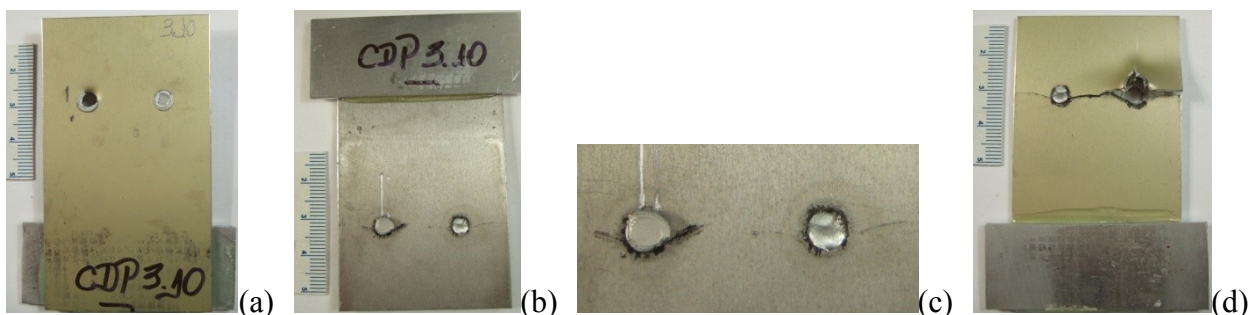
(a) Outer face of countersunk Glare sheet of the GI-Al joint (C); (b) Inner face of flat-bottom hole monolithic Al-alloy sheet; (c) Detailed view; (d) Inner face of Glare sheet.
